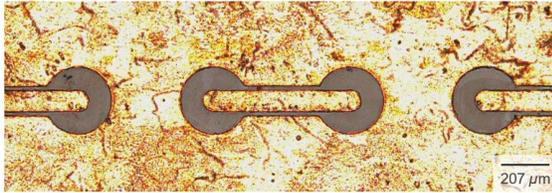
Top view of the fabricated test vehicle with CPWG and landing pads for flip-chip assembly.
